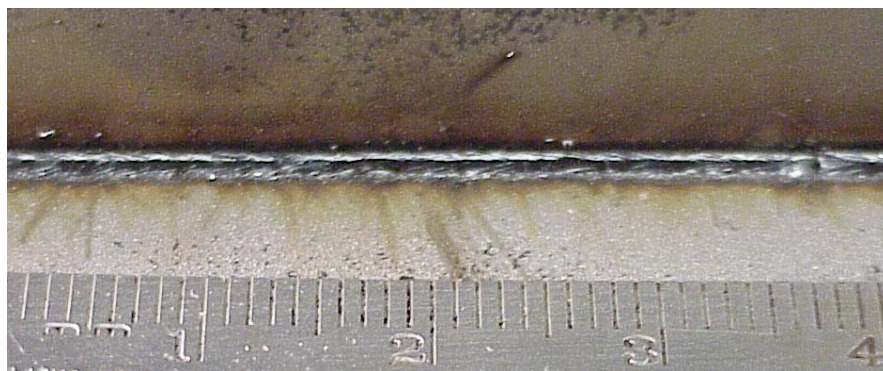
Backside of typical STT-HLAW weld on 0.109 inch Tee-joint configuration.
